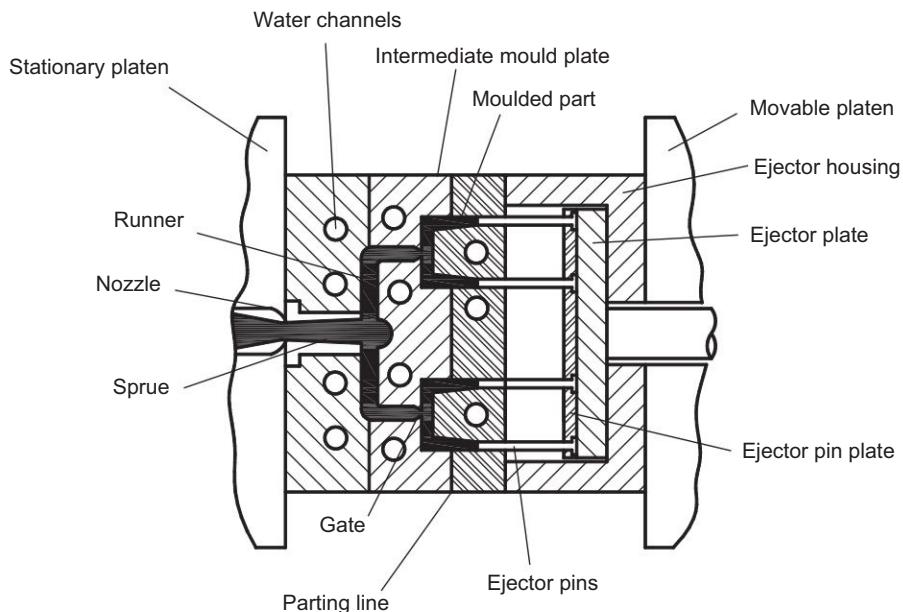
Details of a two-plate mould with multiple cavities showing the ejector plate and the cooling channels with the mould opened
